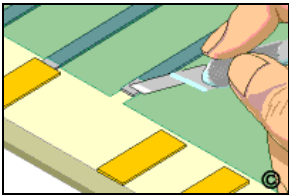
Remove the defective contact and soldermask from the connecting circuit.
